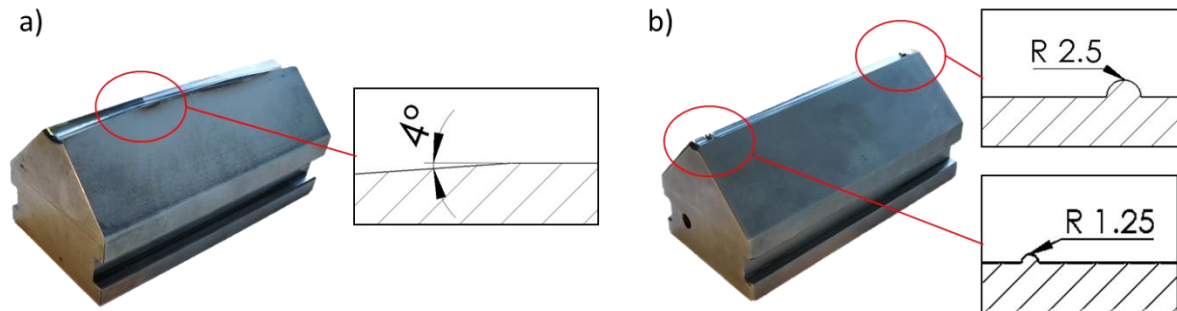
Forming tools used for infeed (a) and recess (b) rotary swaging
